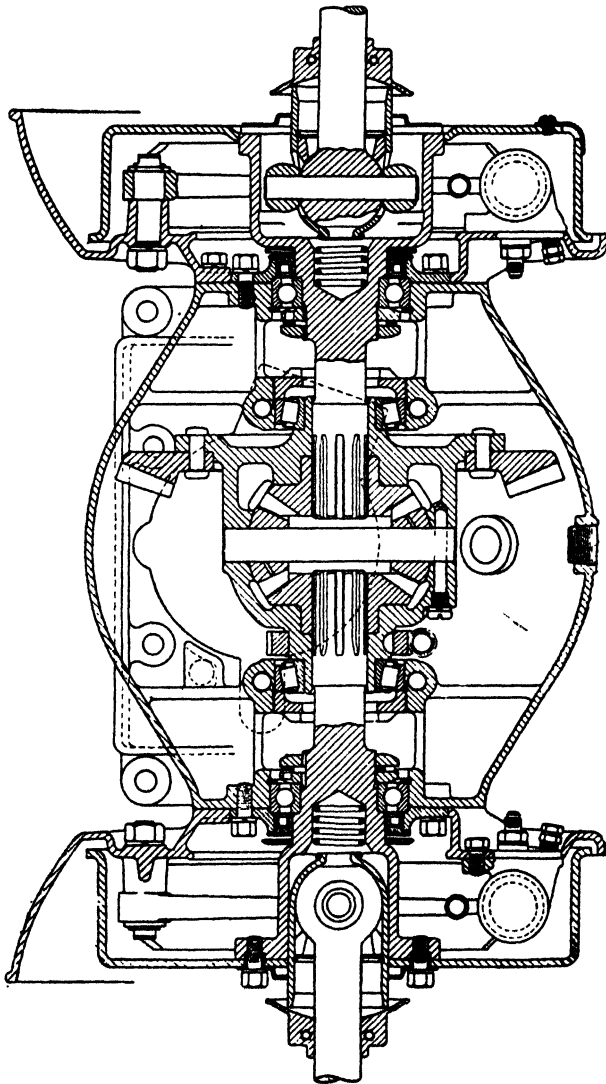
SECTION THROUGH CENTER HOUSING OF CORD FRONT DRIVING AXLE, SHOWING BRAKES MOUNTED ON THE HOUSING.
